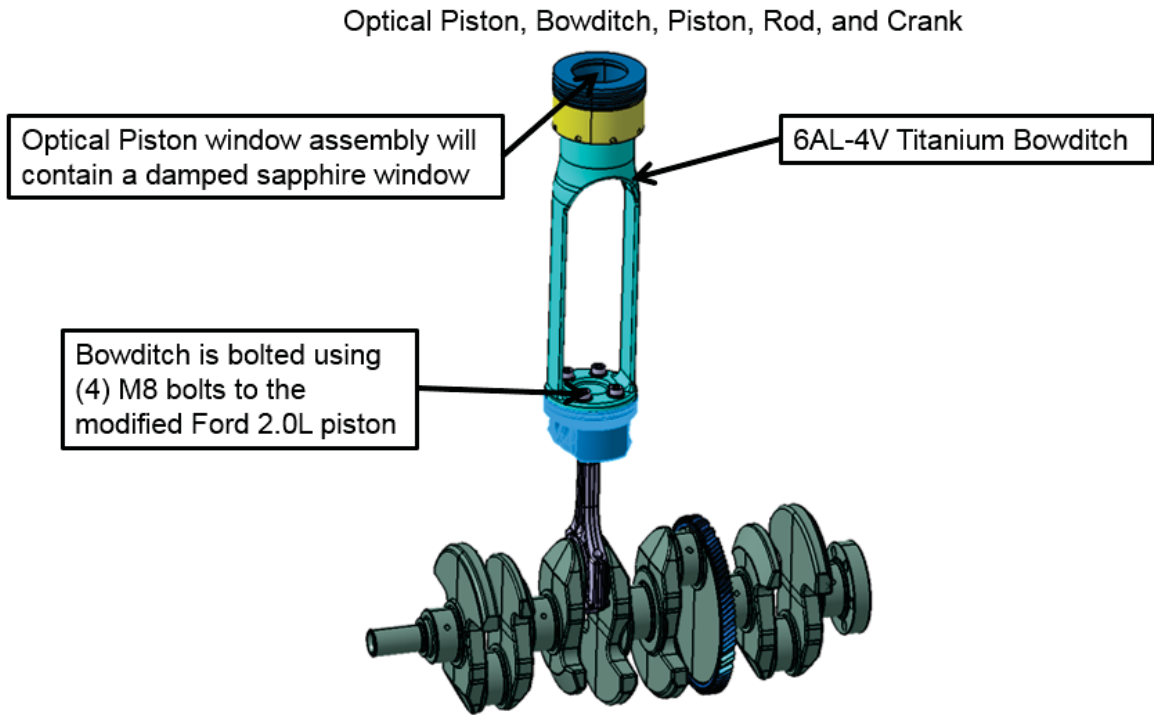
Optical Engine Bowditch Assembly ¹⁰
